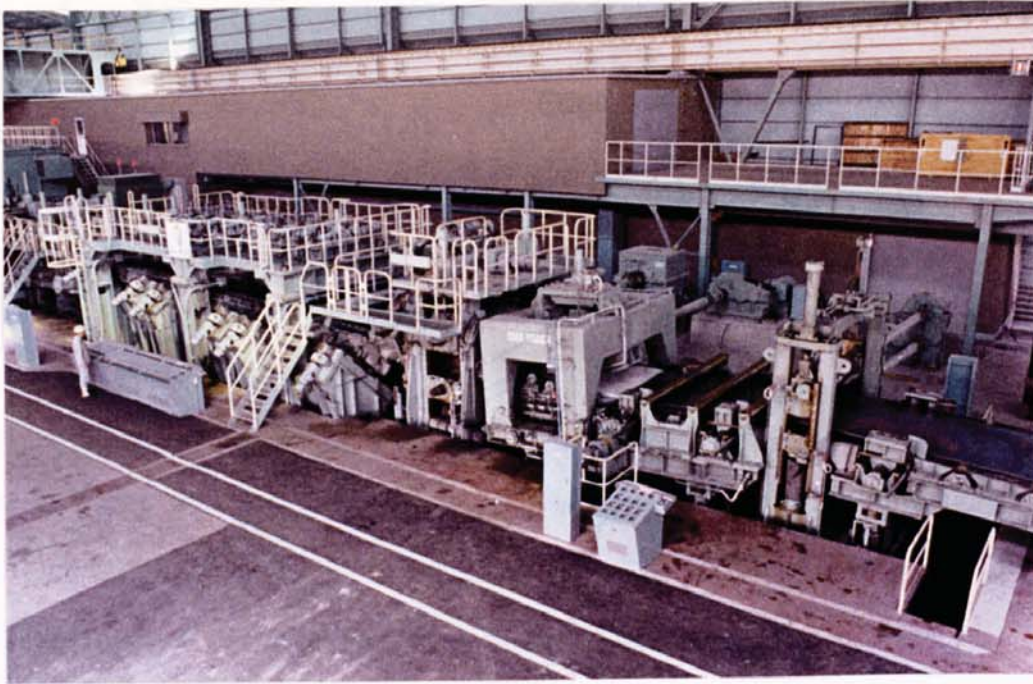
Appearance of the 26in ERW full cage roll forming mill at the Chita works of Kawasaki Steel Corporation
